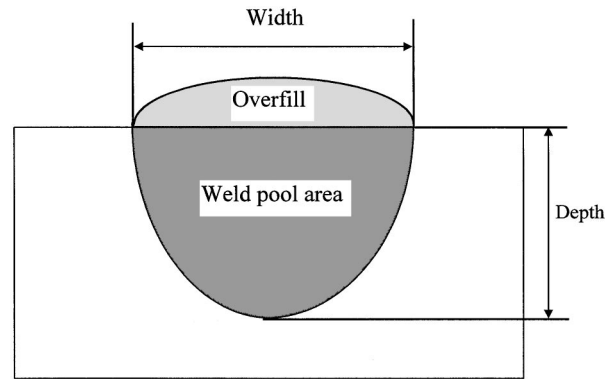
Measurement of weld pool width, depth, and cross-section area.
